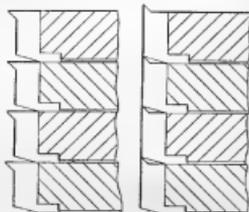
Linotype; tabular rule-slugs, before and after using the roller. Enlarged.
